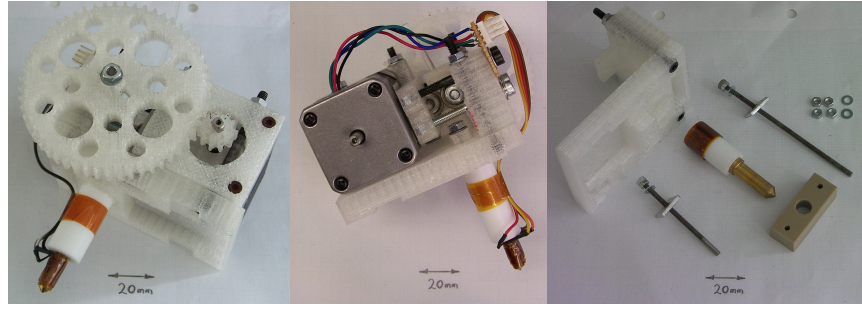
The geared extruder design, showing front (left) and back (middle) views. In addition, a further modification implementing a PEEK bracket & a nozzle the encases the thermal barrier to reduce PTFE insulator swell is shown partially assembled (right)
